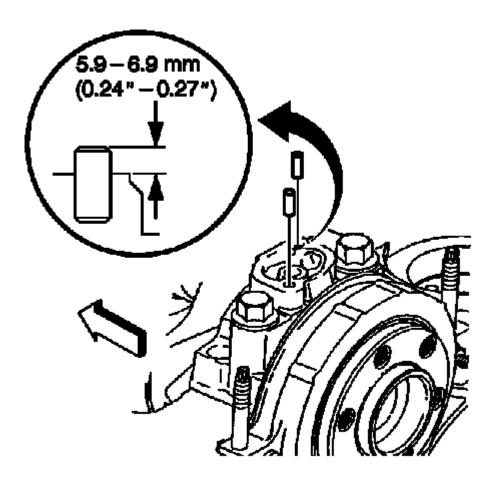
Oil Pump Locator Pins Proper Installation Position Courtesy of GENERAL MOTORS CORP.
